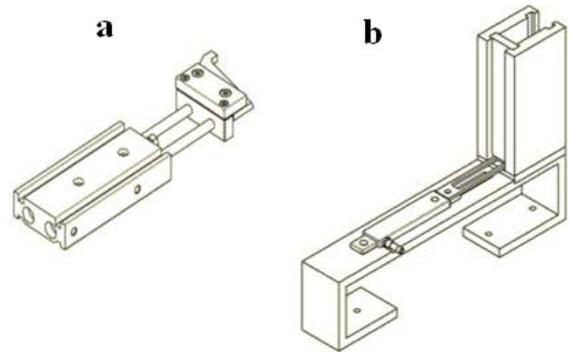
Cutter design and container assembly with slide: a) cutter and b) container with slide
